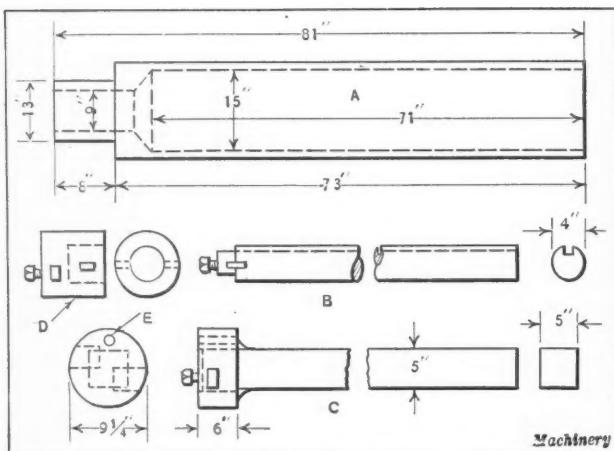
Method of boring Bronze Bearing for Extension Spindle
